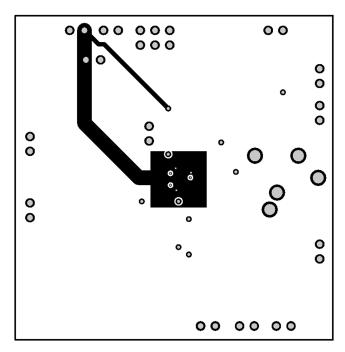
Recommended DSBGA PCB Layout: Inner Layer 2
